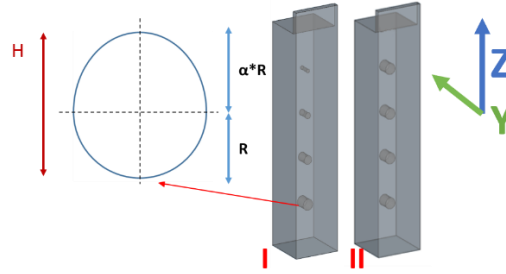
Samples fabricated by SLM and close-up on a pore section
